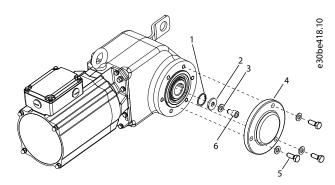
Assembly of the Mounting Arrangement and the Hollow Shaft Cover
